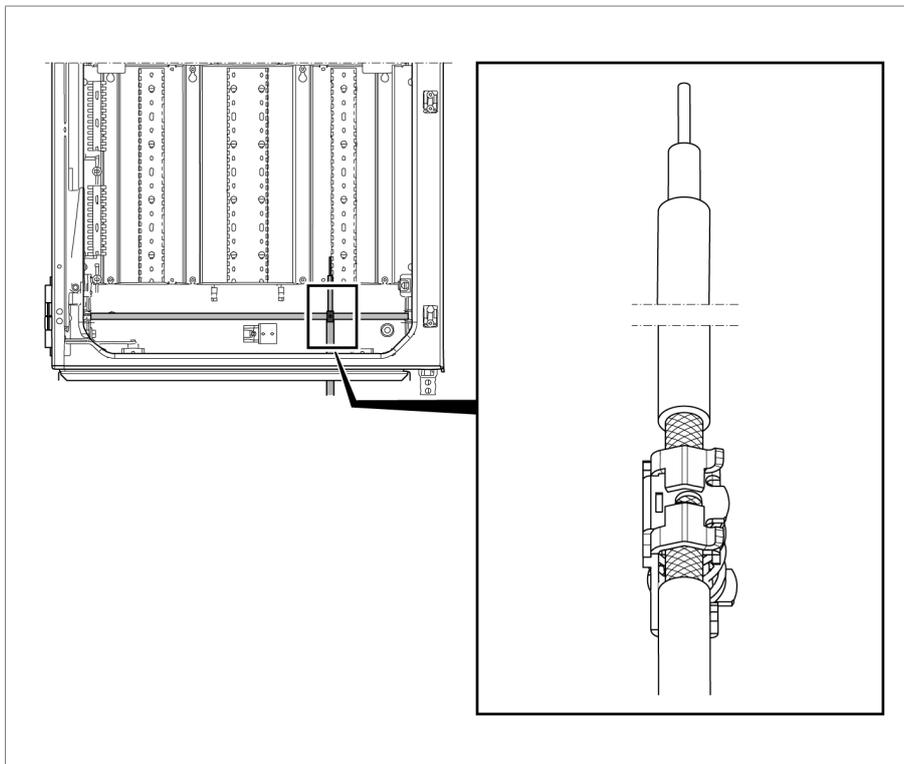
Place the cable shield with clamping bracket on the grounding bar of the control cabinet.
